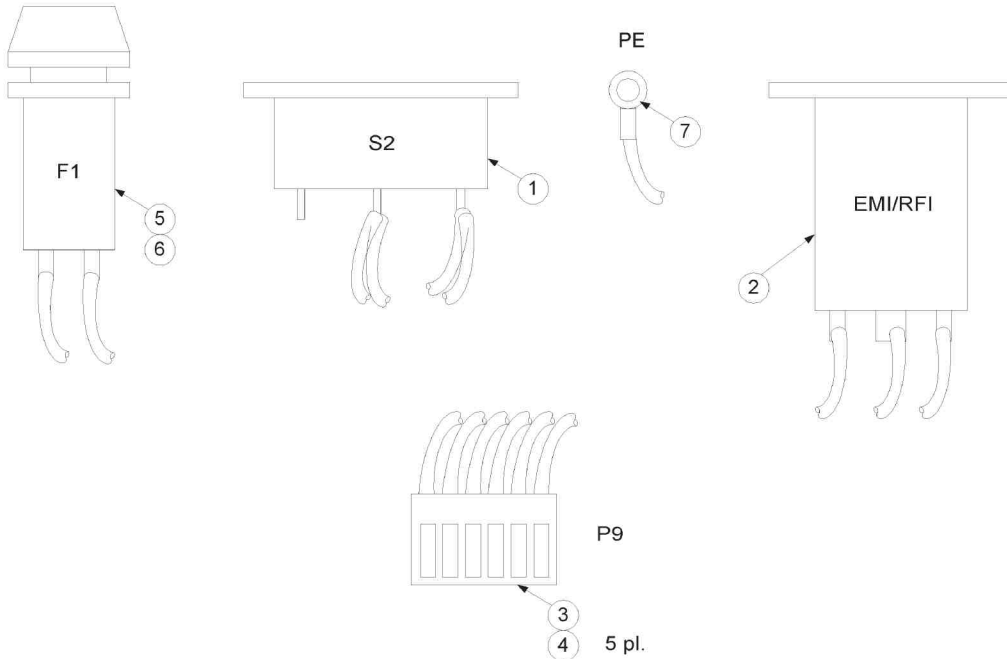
VOLTAGE SELECTOR SWITCH ASSEMBLY EXPLODED VIEW
